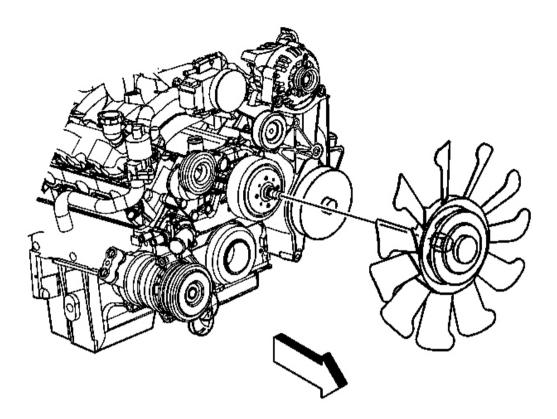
View Of Fan Assembly Courtesy of GENERAL MOTORS CORP.
